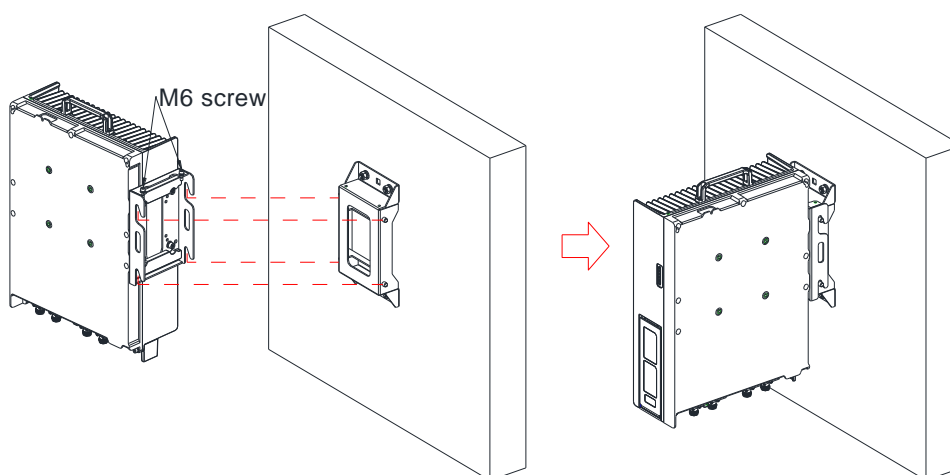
Fix RRU on Wall, Blade Mount
